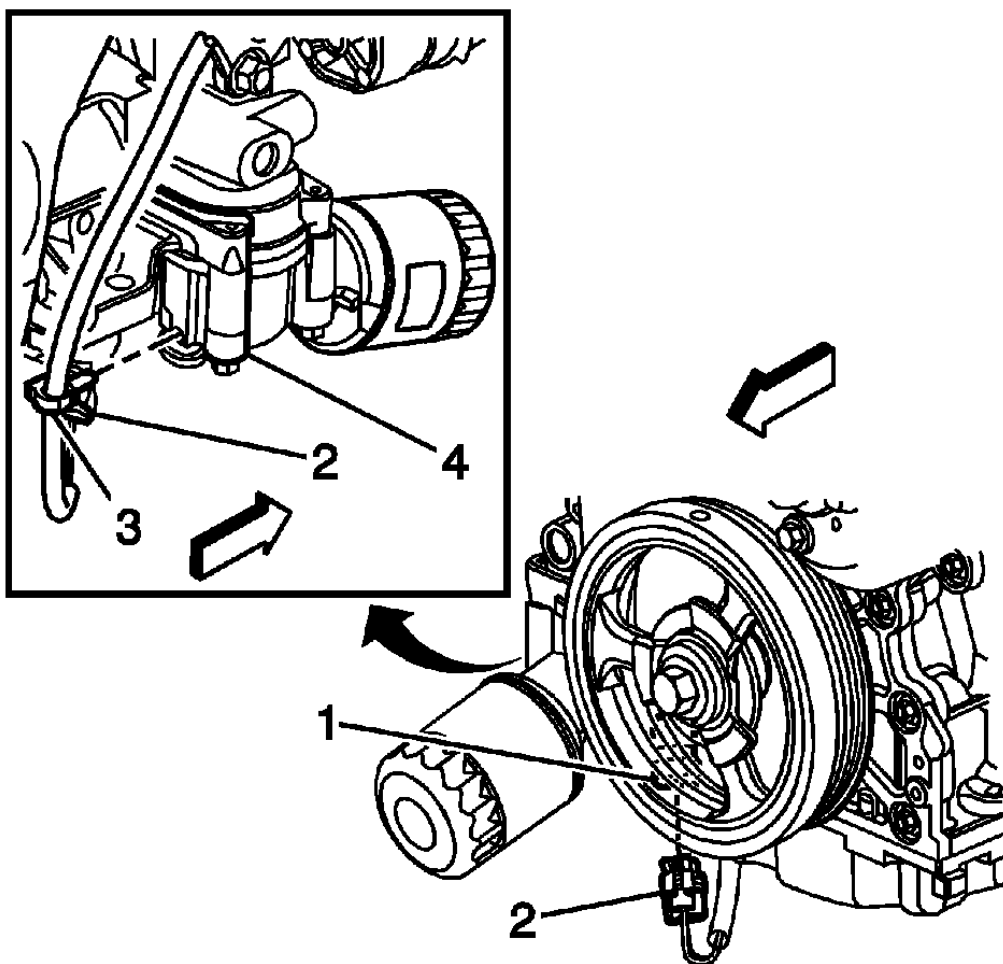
View Of Oil Pressure Switch Electrical Connector & Oil Filter Adapter Wiring Harness Retainer
